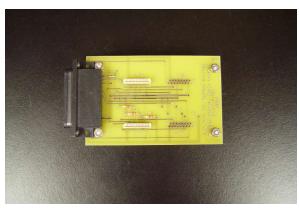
Top view of the 1501 board after assembly. Note that only the two necessary Molex connectors have been installed.
